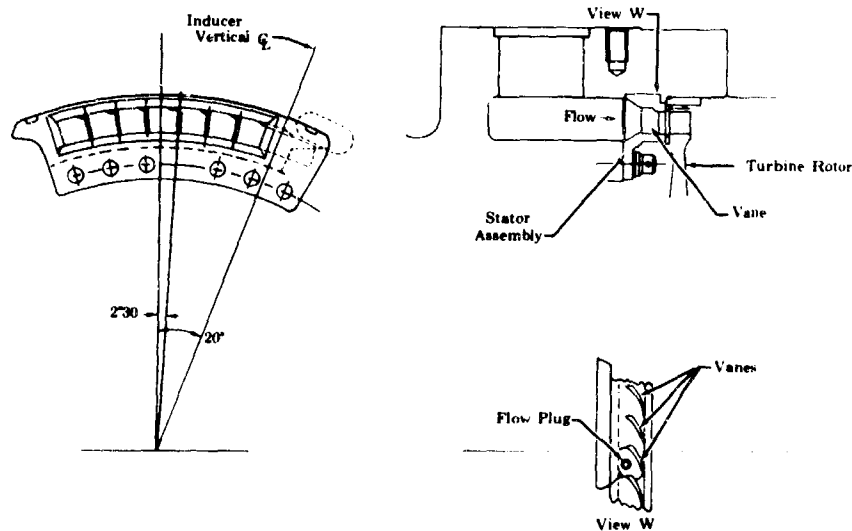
Fuel Low-Speed Inducer Turbine Stator Assy
